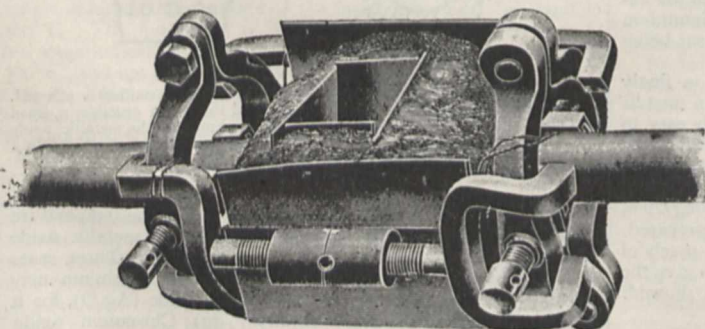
Casing packed round with moulding sand in readiness for the welding operation.
